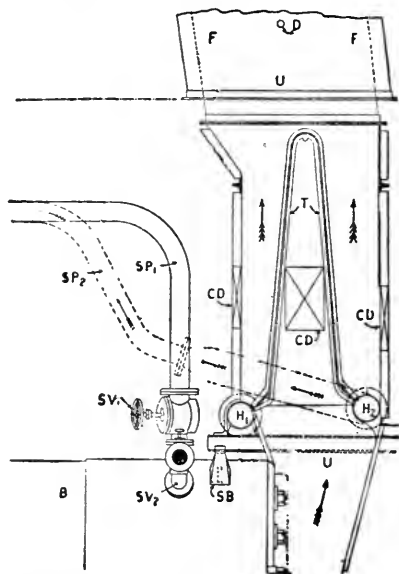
PROF. WATKINSON'S SUPERHEATER FOR MARINE BOILERS.
